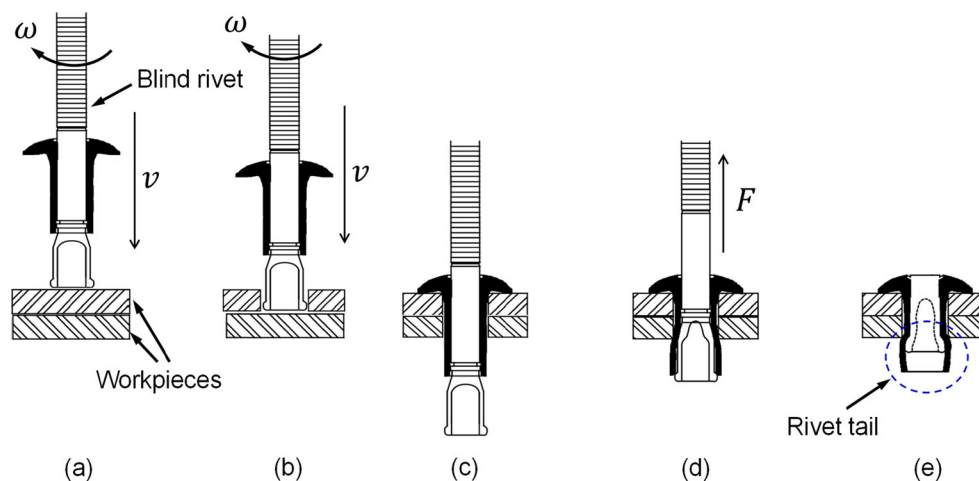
Illustration of the friction stir blind riveting (FSBR) process. a The rotating blind rivet approaches the workpieces with feed rate (v) and high spindle speed (ω); b the rotating blind rivet penetrates the frictionally heated and softened top workpiece; c the blind rivet has penetrated both
